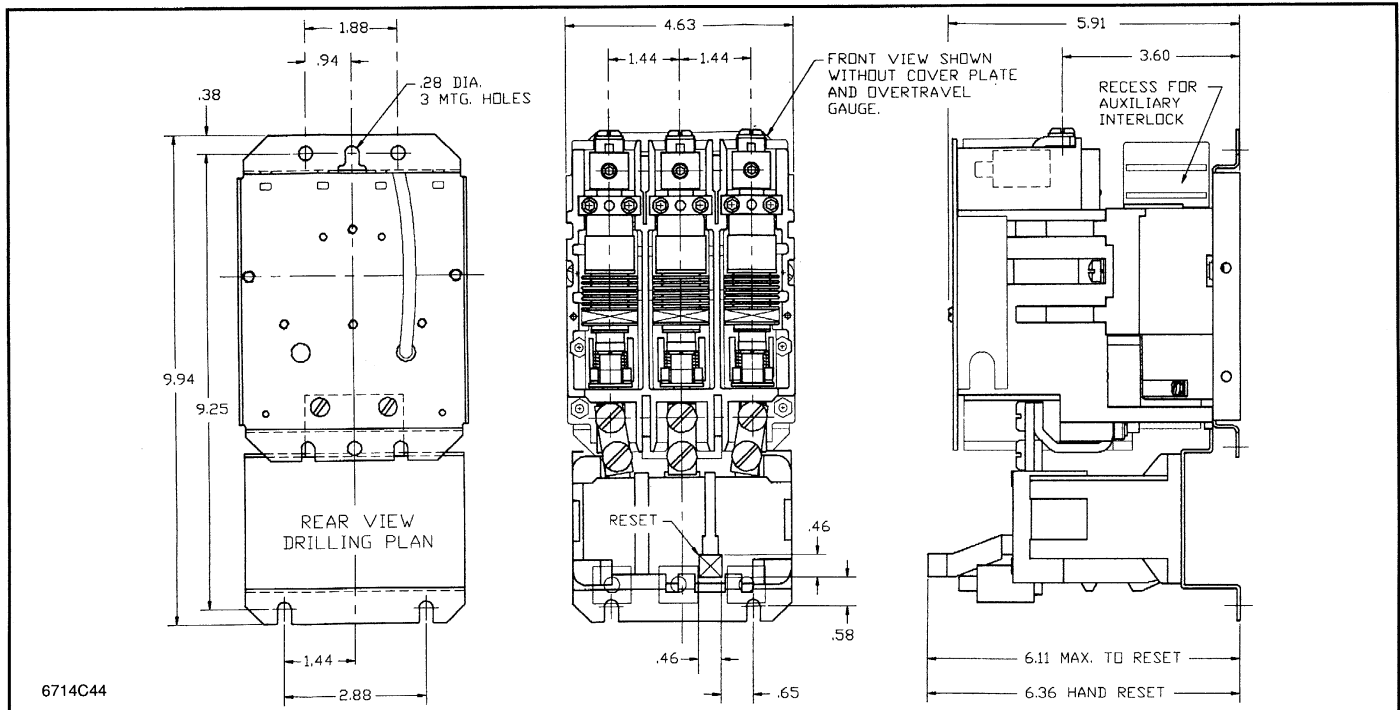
Nonreversing Controller (V200) Dimension Drawing (Dim. in inches)
